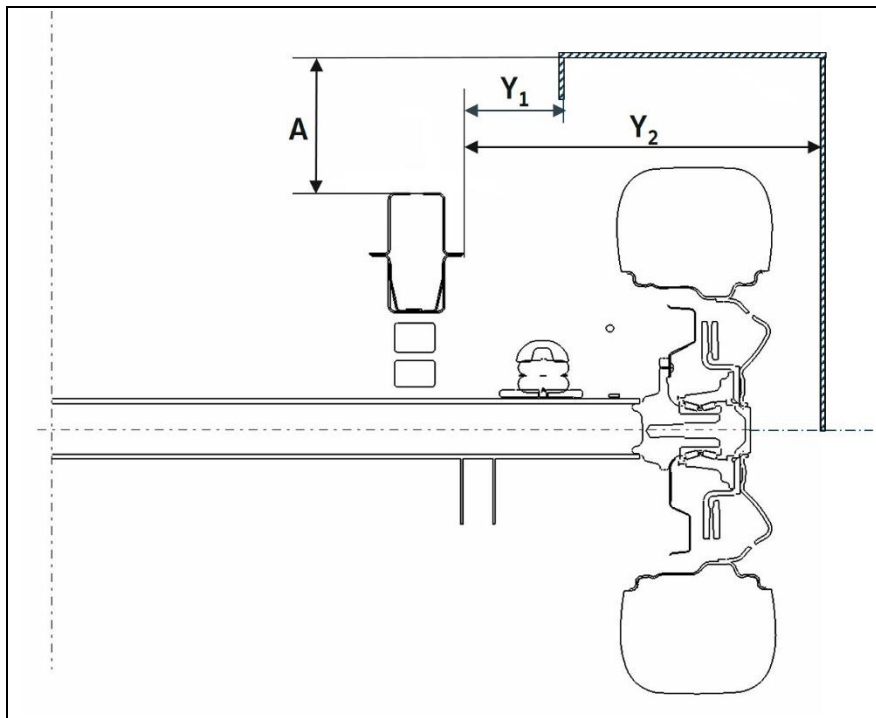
A-A cross-section, wheel clearance for max. wheel housing trim up to wheel centre
